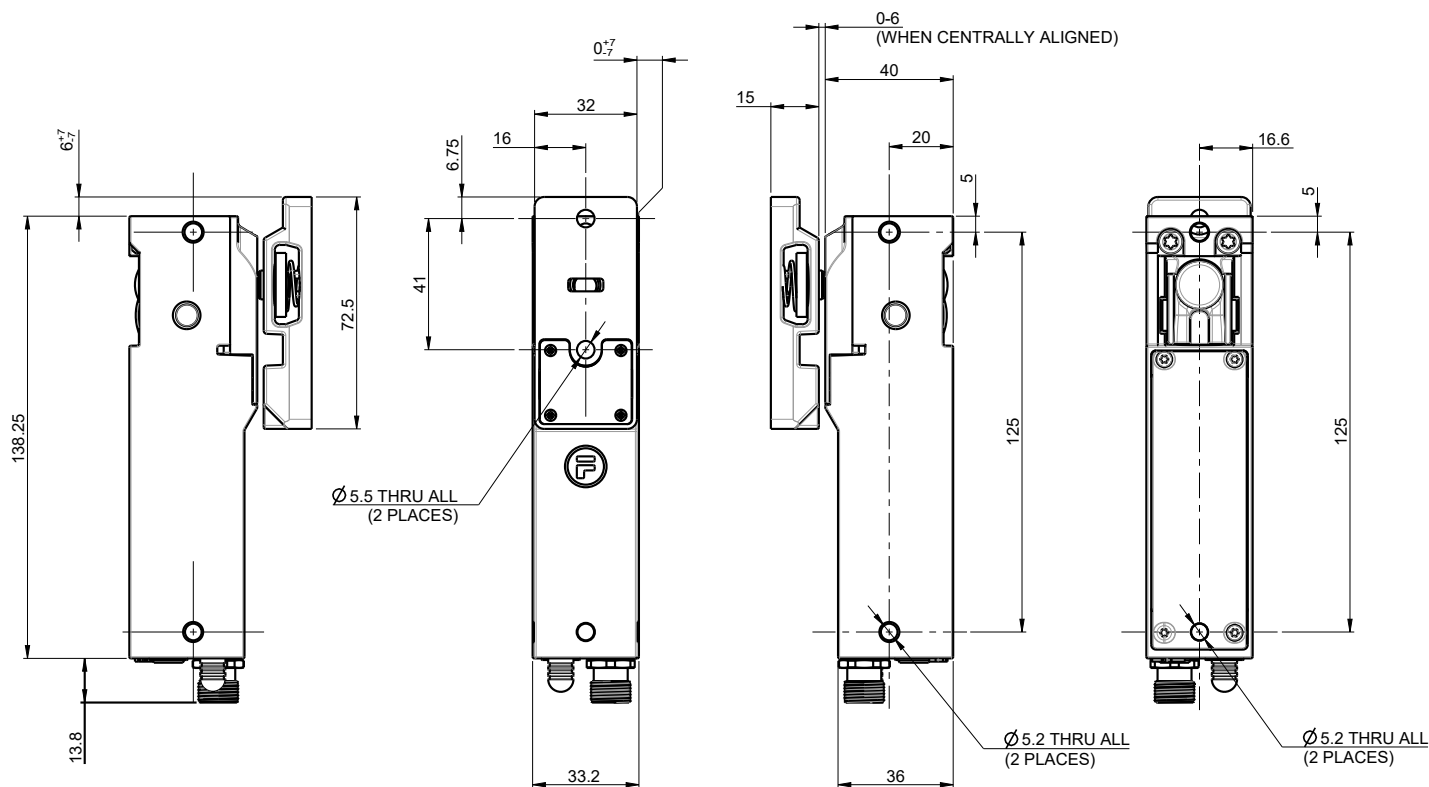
Dimensional Drawing - ATOM Switch Body with Escape Release only
